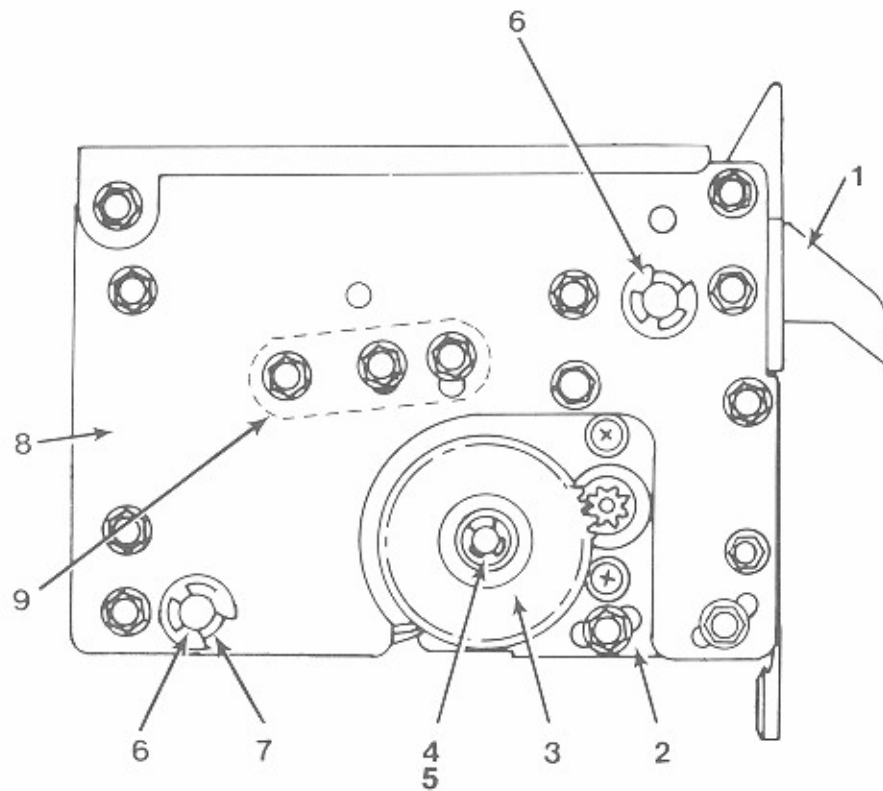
8. OBA-2 Transport Assembly (Sheet 3)
